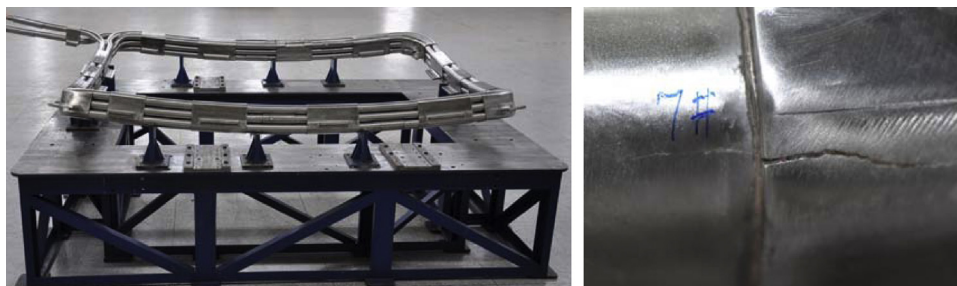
The ELM prototype coil and the cracks in the jacket surface.
